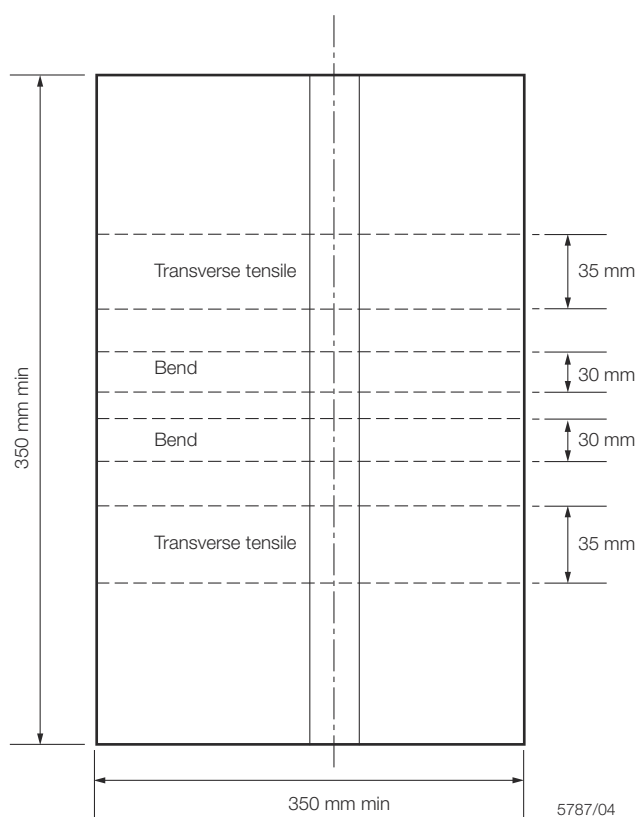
Butt weld test assembly (two-run technique)
